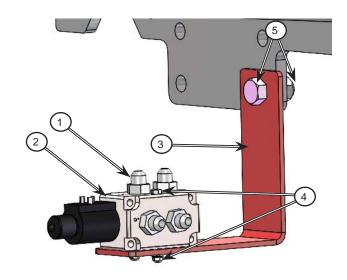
Fasten the ESV onto the mounting bracket (RH side shown)
